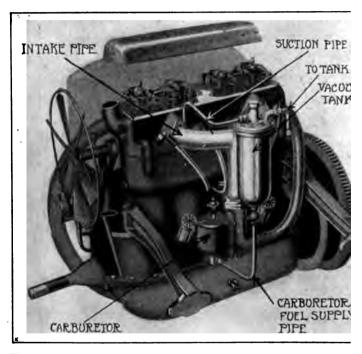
Stewart Vacuum Tank Applied to Inlet Manifold c rolet Motor.
